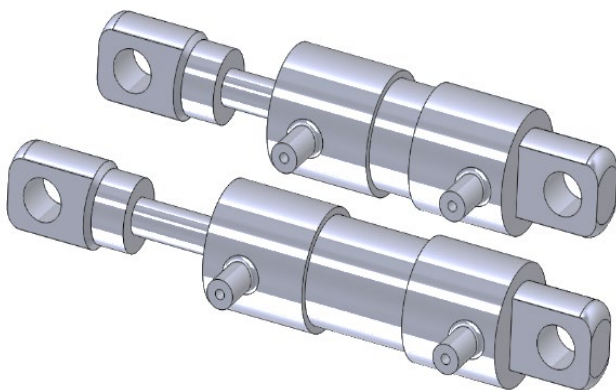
3D Assembly of a double-acting hydraulic cylinder
